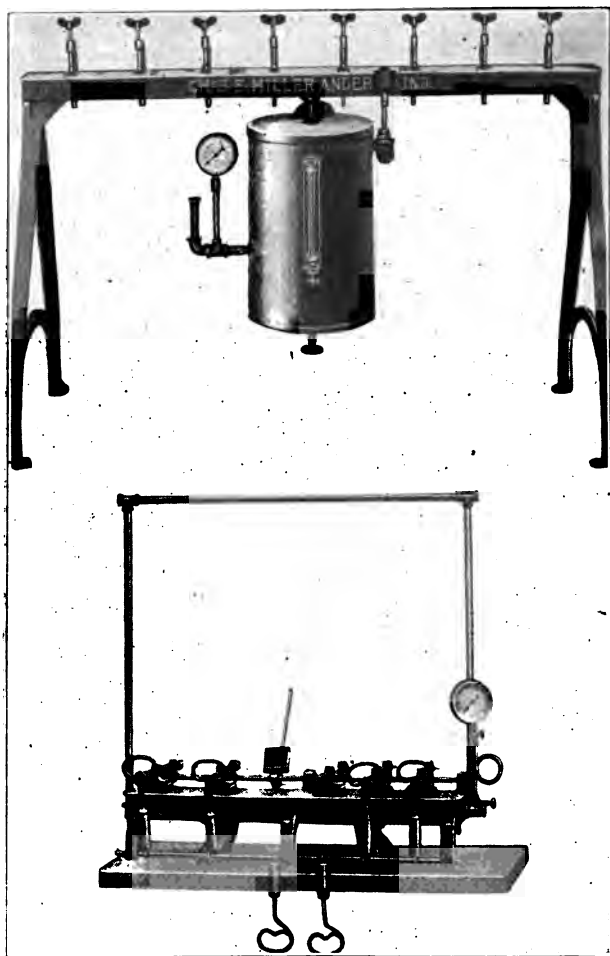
Tube vulcanizers. Upper unit has hard "C" clamps, lower uses spring pressure.
